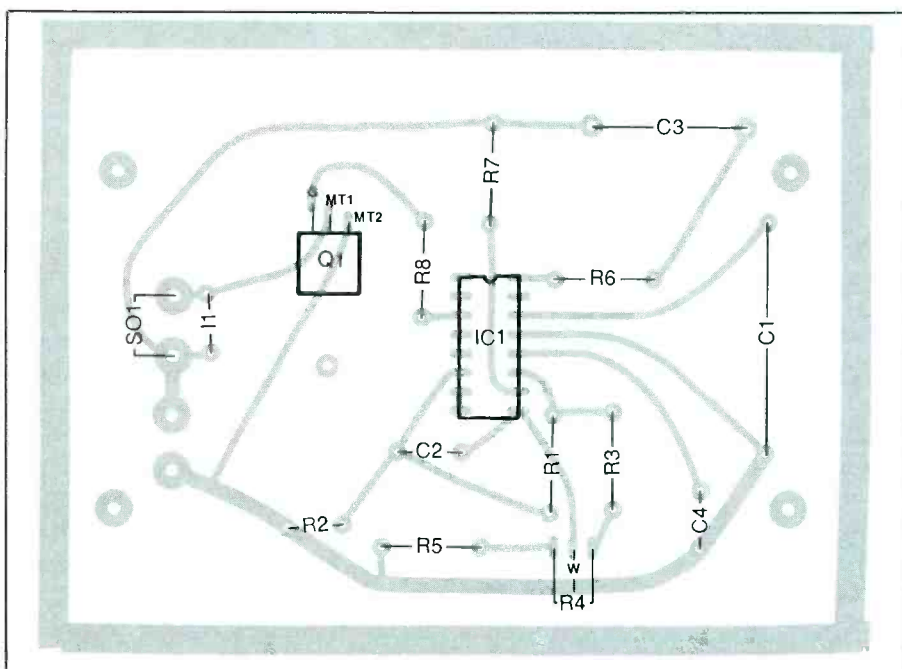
The wiring diagram for the pc board. Use this layout as a guide to component placement if you wire the circuit on perforated board.
